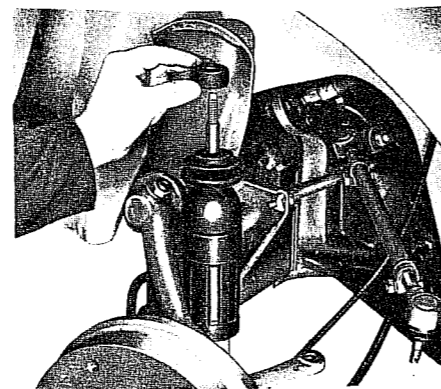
Fit the lower damping ring with its shoulder upwards as shown.
